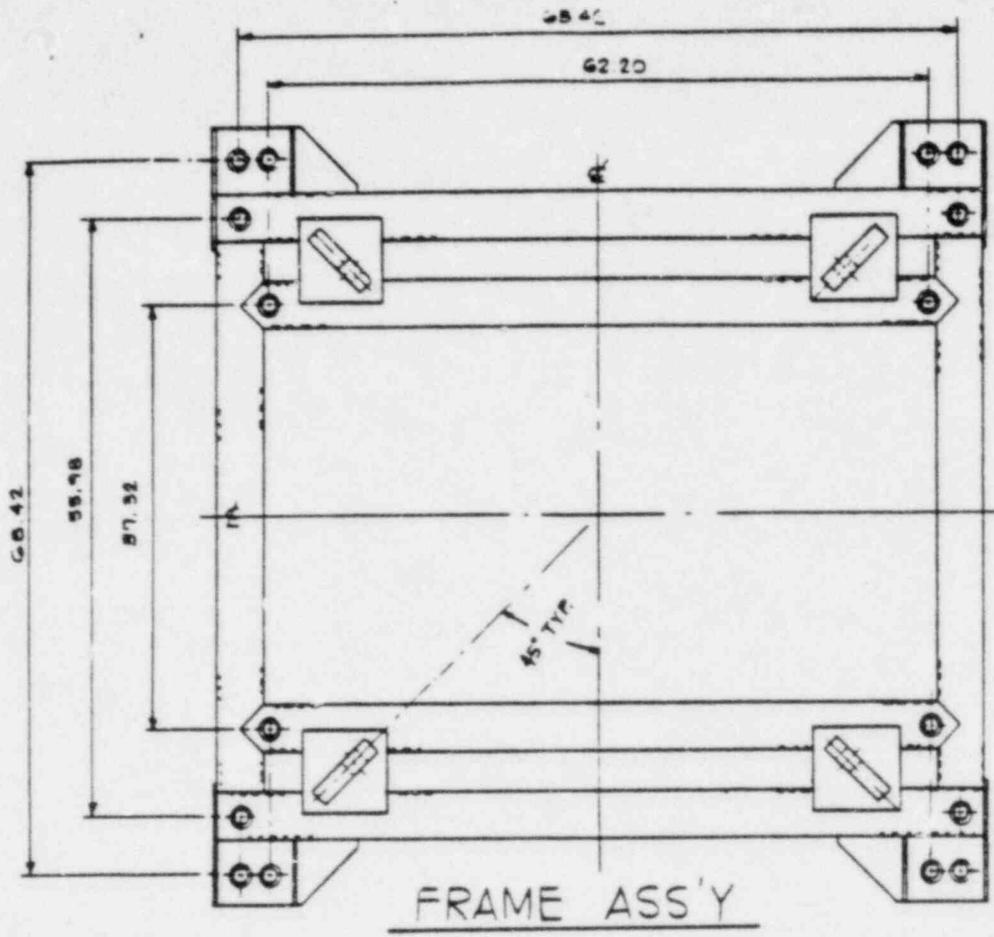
SPENT FUEL RACK LIFTING FRAME ASSEMBLY
